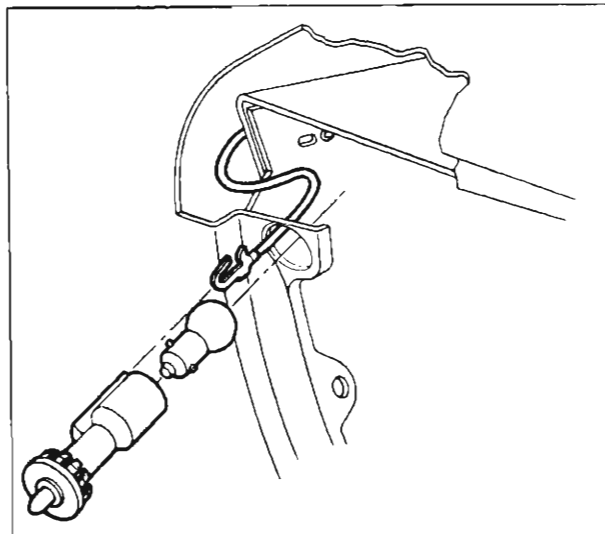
Instrument Panel Compartment Switch and Lamp Assembly
